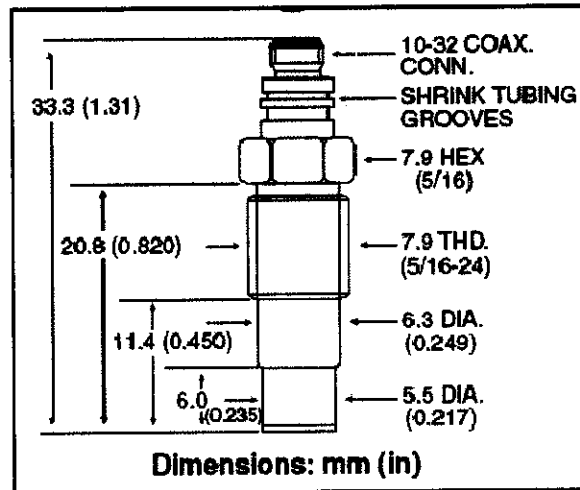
The dimension of pressure transducer for explosion vessel (Omega Engineering Inc, 2009).
